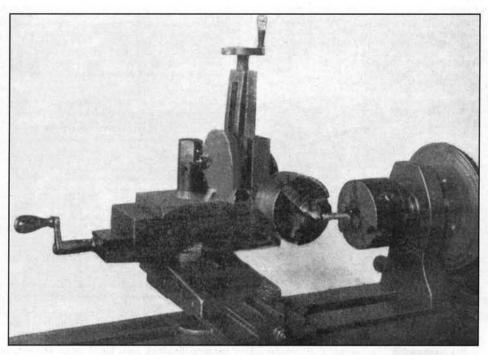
Squaring the tap Shank by End Milling in the Lathe.
